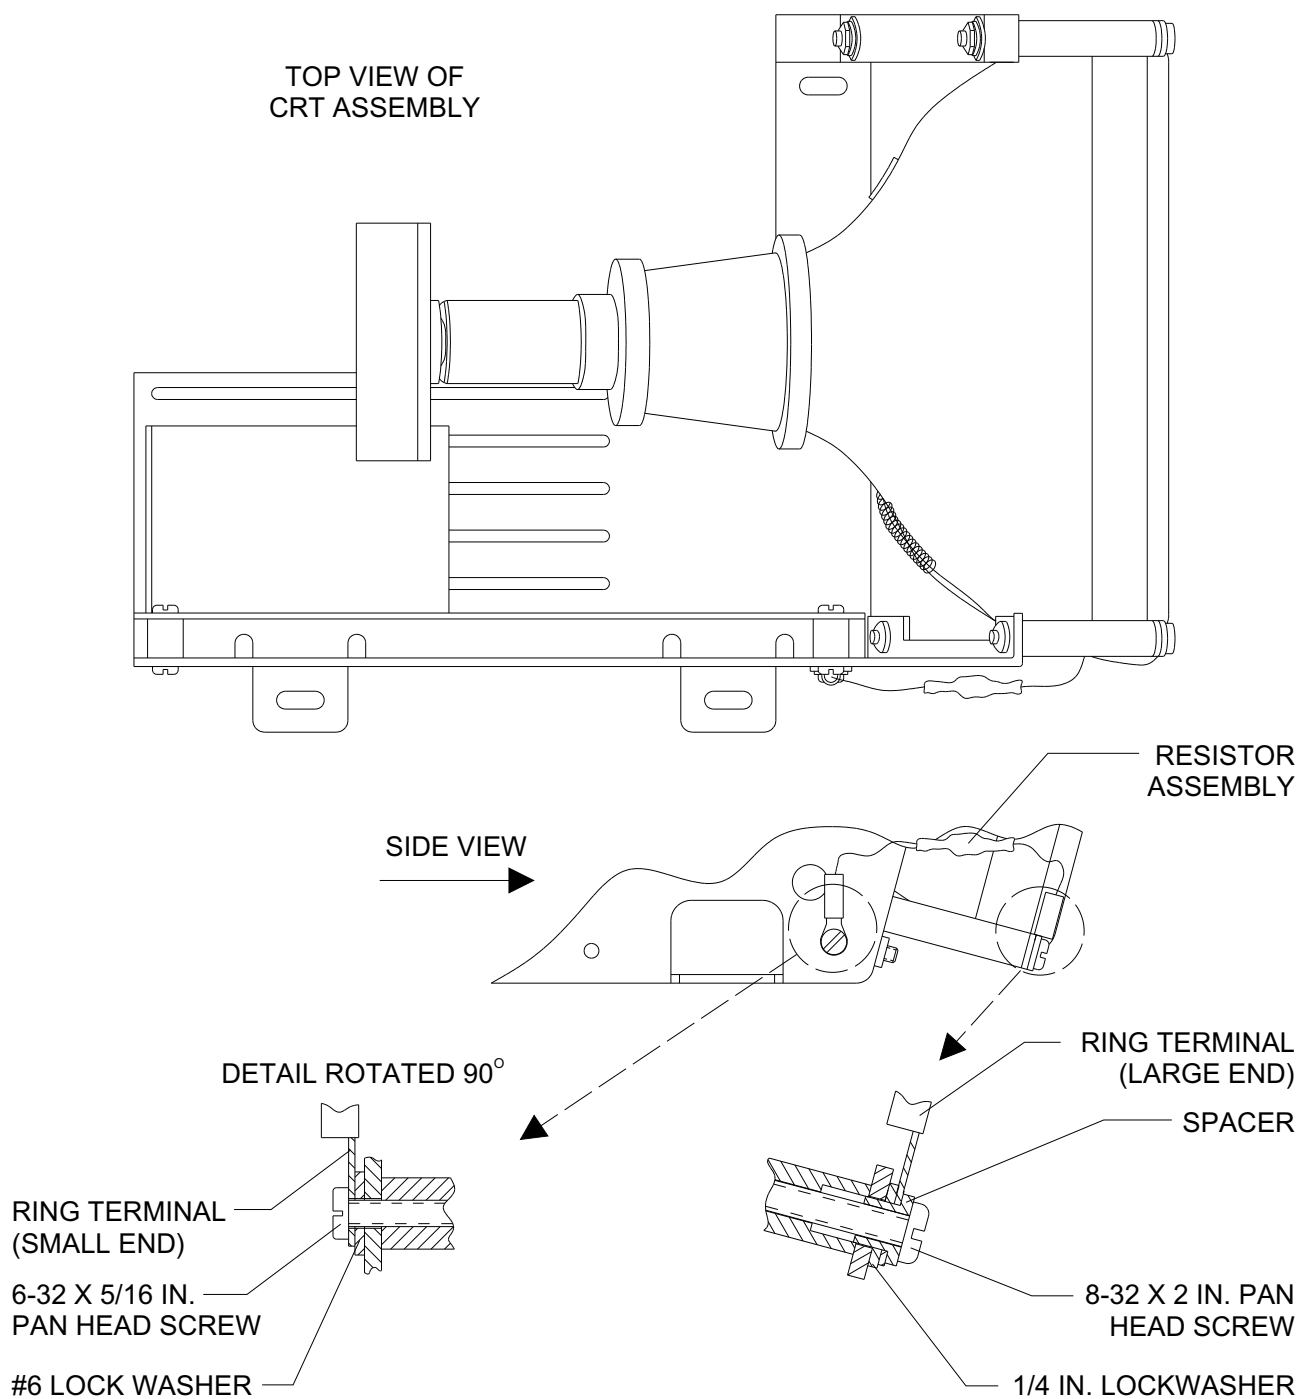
CRT ASSEMBLY AND RESISTOR INSTALLATION DETAILS
